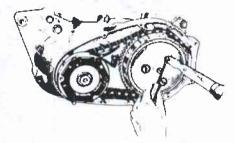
Clutch spring tension can be adjusted as shown after removing the primary chain cover. Refer to text.
